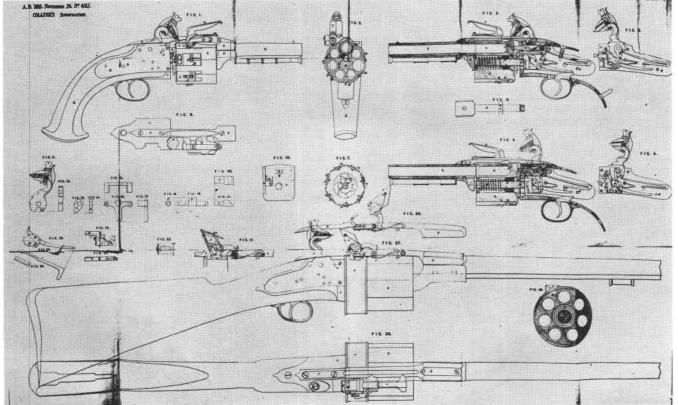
, shews the cock a little raised, the tooth R, being engaged in pushing forwards the end of the lever S, and thereby drawing back the catch bolt U, and the set of short barrels, until that which was united with the long barrel has become disengaged from it. The tooth of the wheel K disengages itself from the catch bolt U, by the action of the spiral spring, and the cock will then be at liberty to be brought to the half cock, and the catch bolt withdrawn so far as to let the next tooth of the wheel R pass by it, and the next short barrel will then be at liberty to engage itself with the long barrel by the action of the helical spring N.
